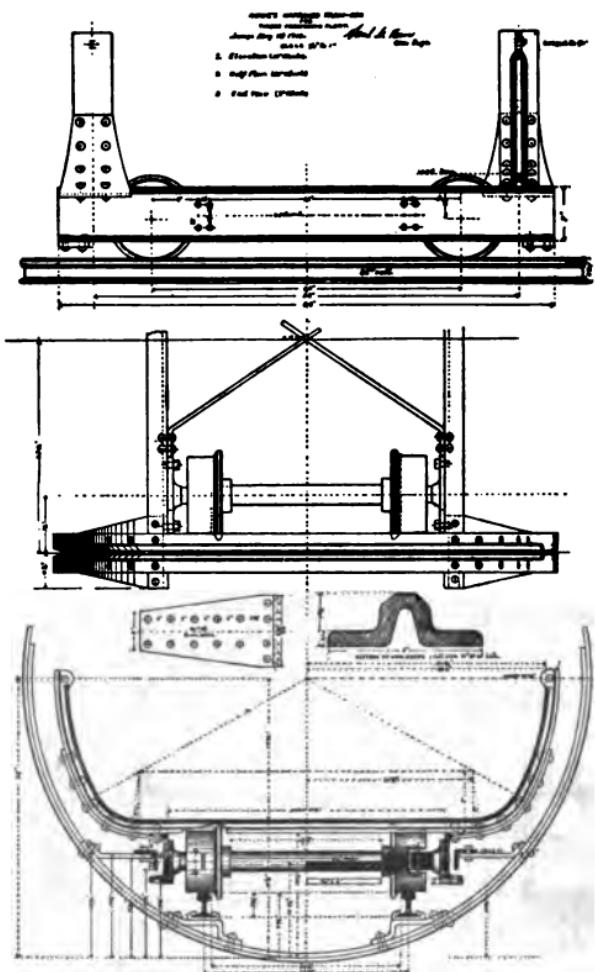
BOWE'S IMPROVED TRAM OAR (BALL BEARING).
